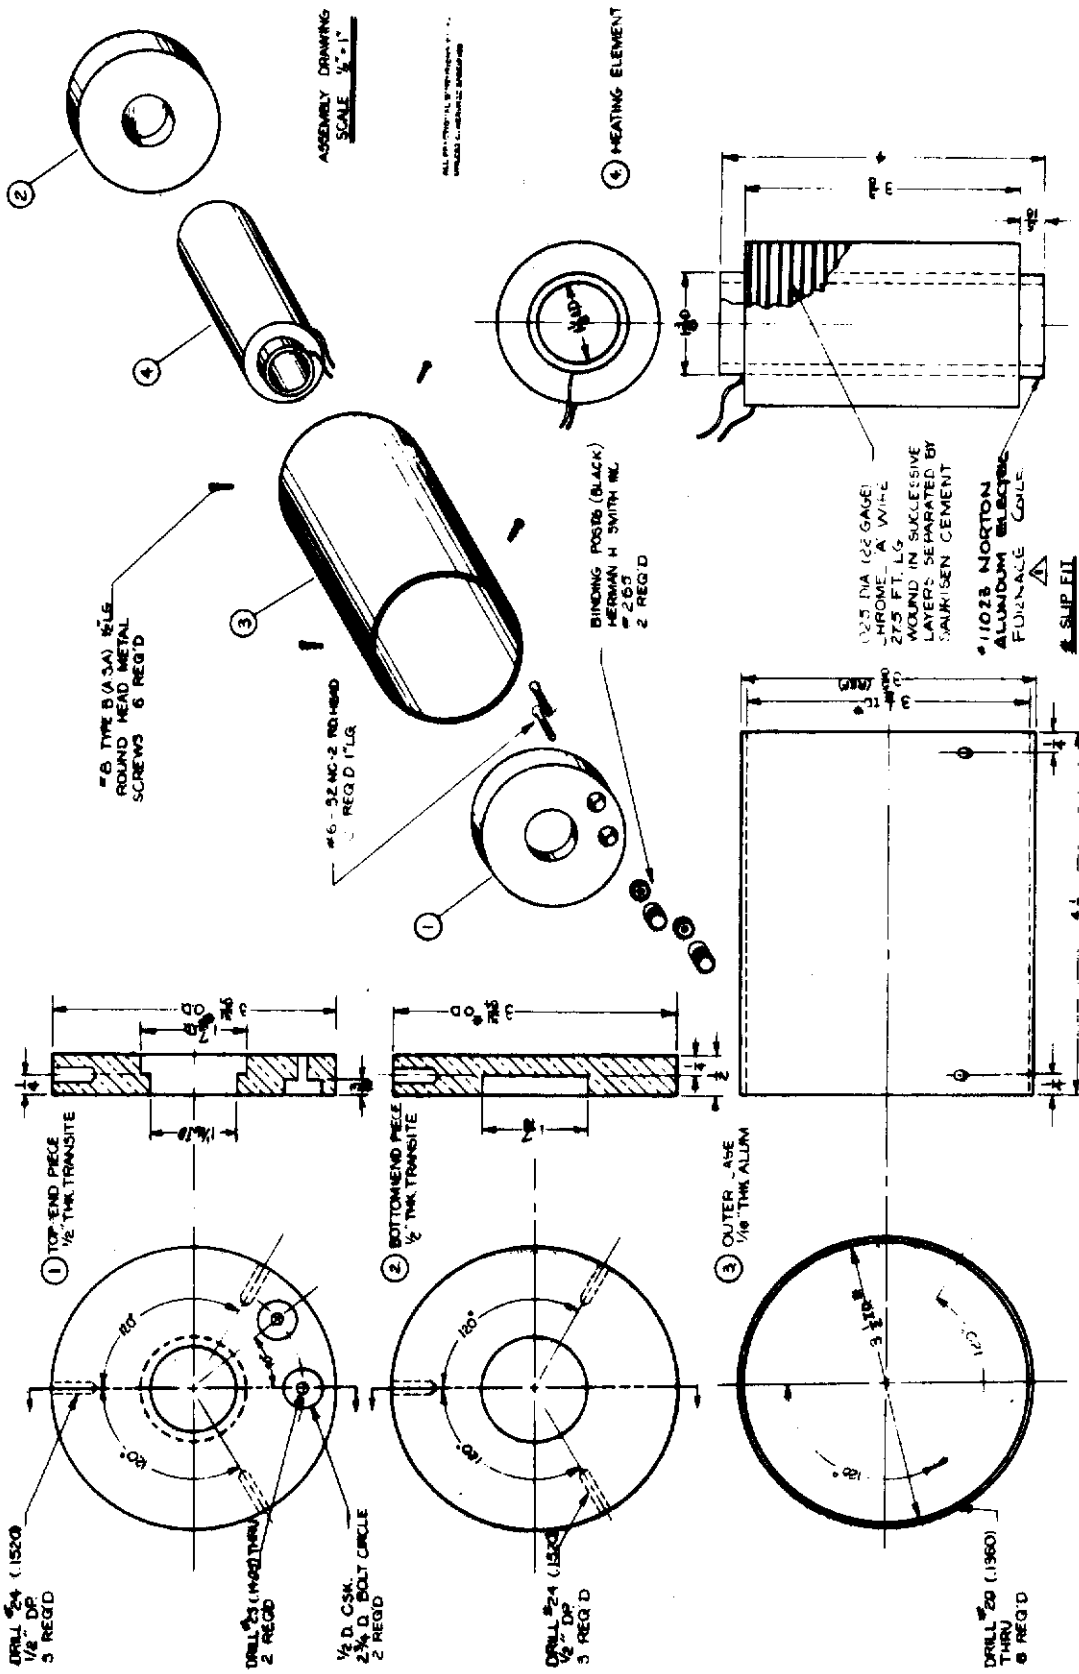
ASSEMBLY FOR 500 WATT 5-ML BOMB FURNACE
